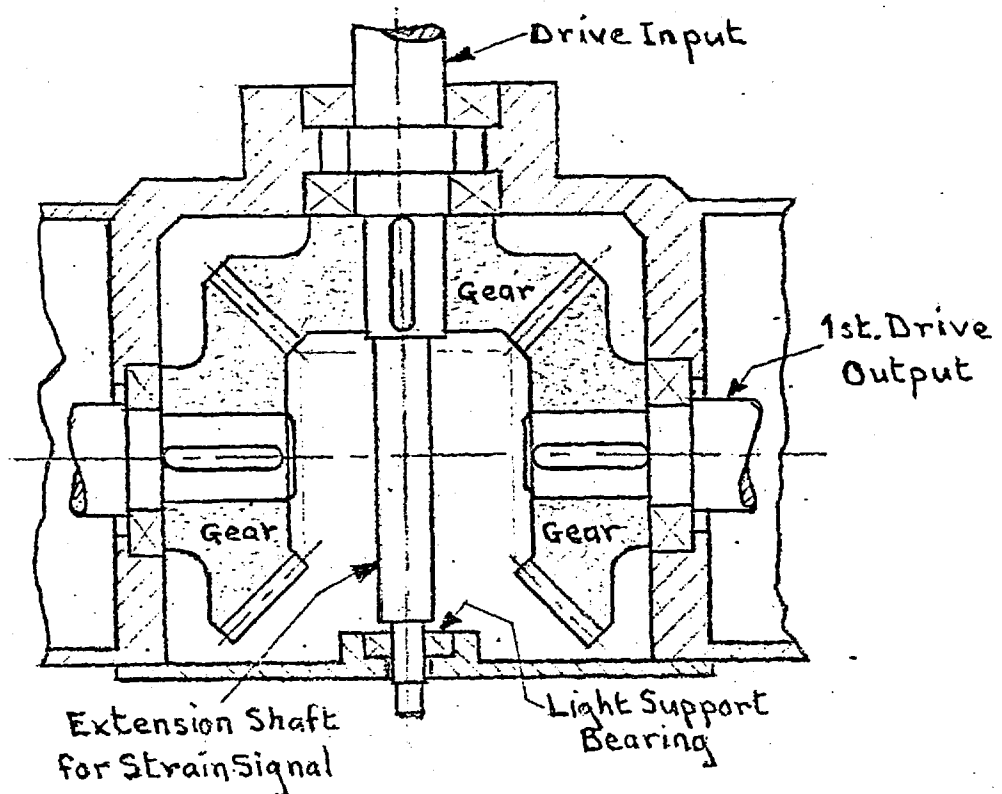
Direction-changing gear box. Drive shafts running in taper roller bearings. Section on horizontal axis: centre.
